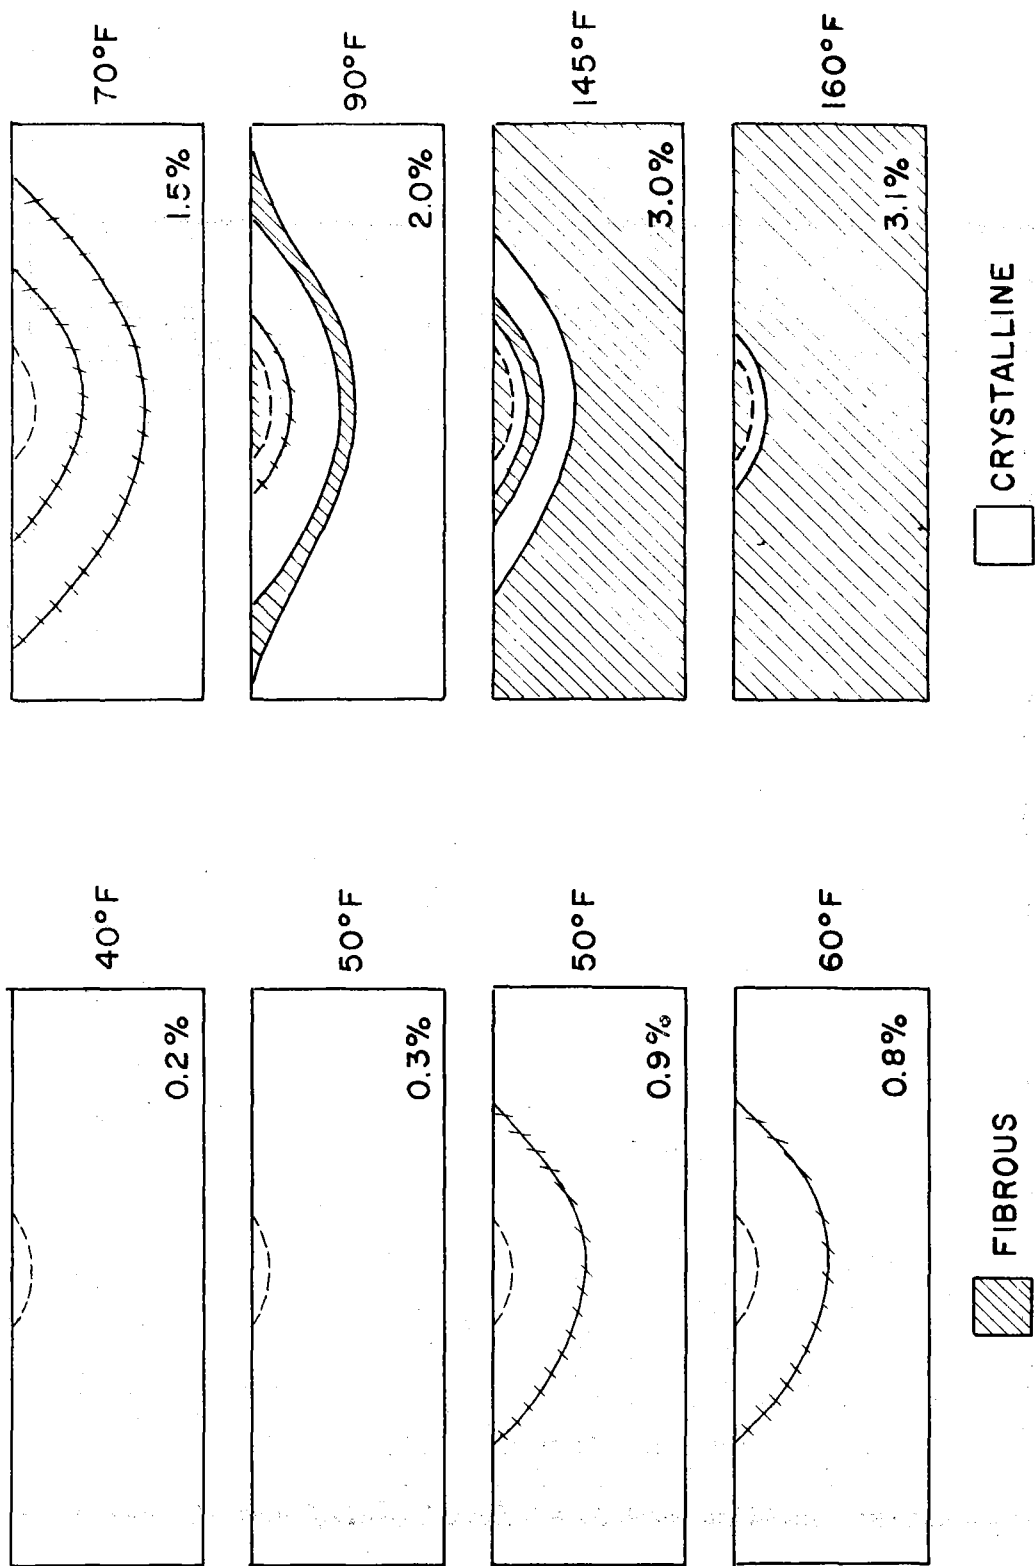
Fracture Behavior of Kinzel Specimens of A-7 Steel Welded with E6010 Electrodes.
